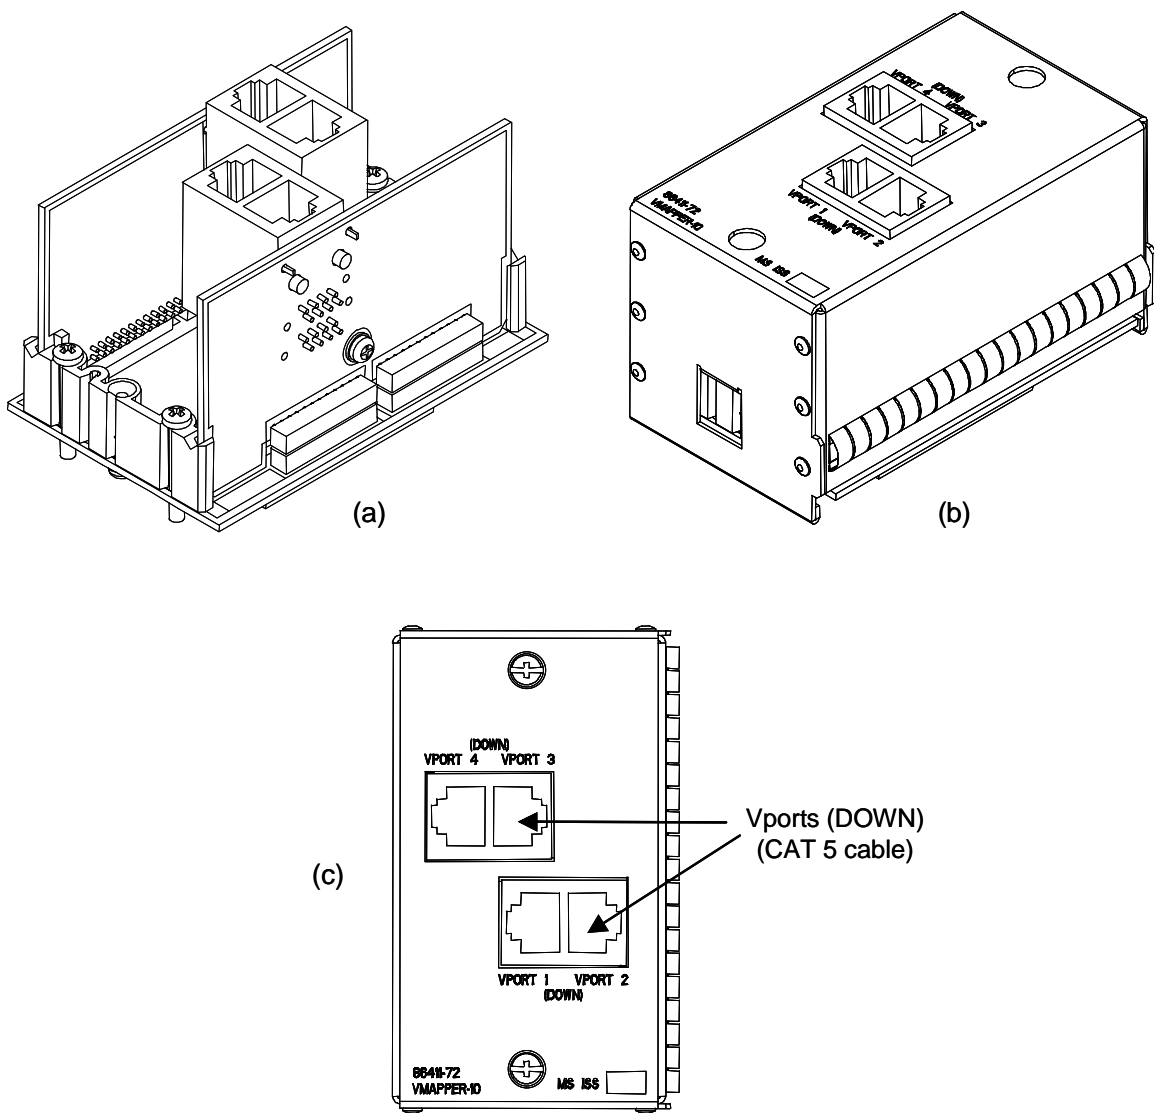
VMapper-10 Unit Paddleboard Assembly: (a) 3-D View without EMC Cover; (b) 3-D View with EMC Cover; (c) 2-D View
